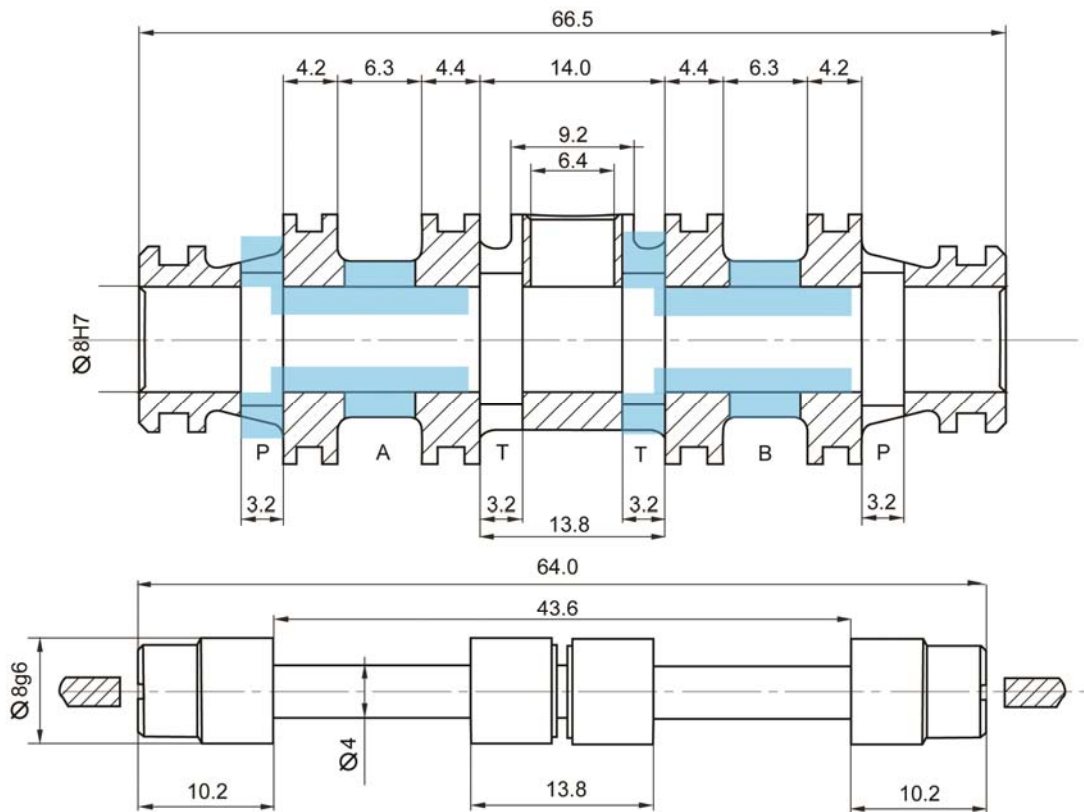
Valve sleeve and spool geometry. All dimensions in mm.
